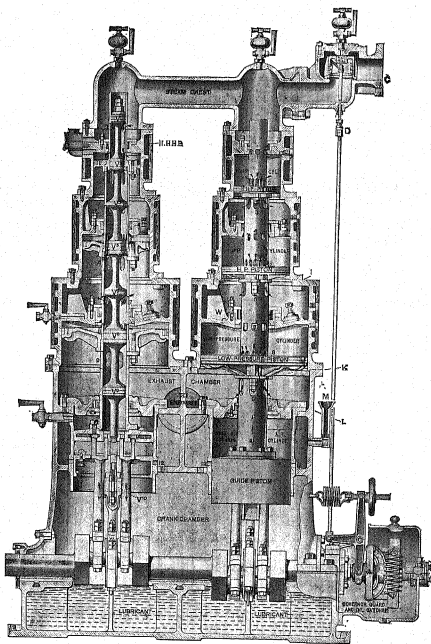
Two-crank Triple-expansion Willans & Robinson Central-valve Engine (sectional elevation)
